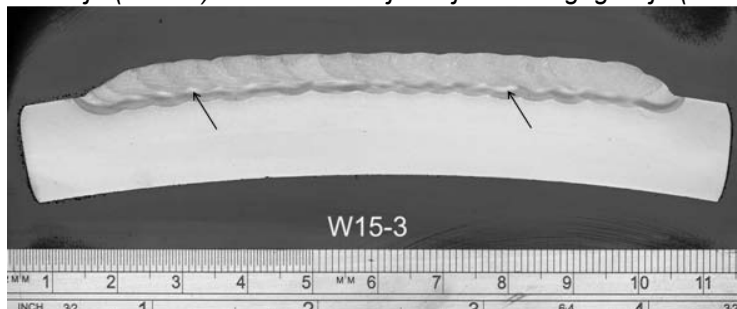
Macrosections taken through the samples relating to test weld W15. Scale ruler shown:
